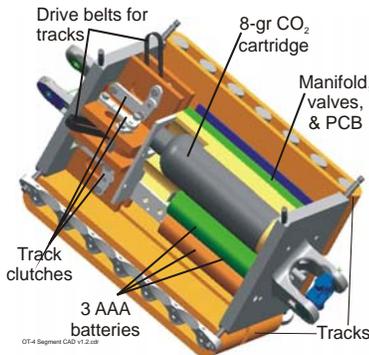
CAD model of one OT-4 segment (tracks on top and side removed to reveal internal components).
